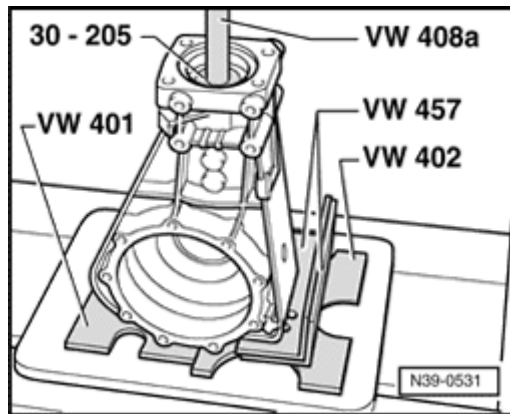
Installing large tapered roller bearing inner race onto pinion shaft
